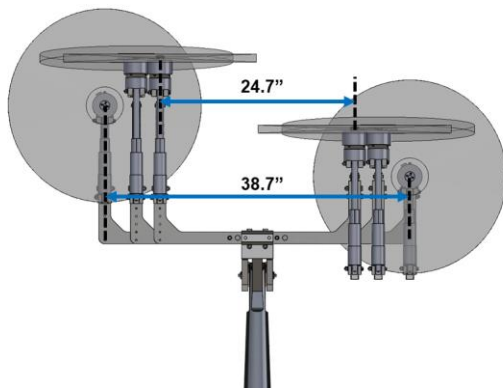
Front view of MTB with horizontal dimensions of the rotors.
